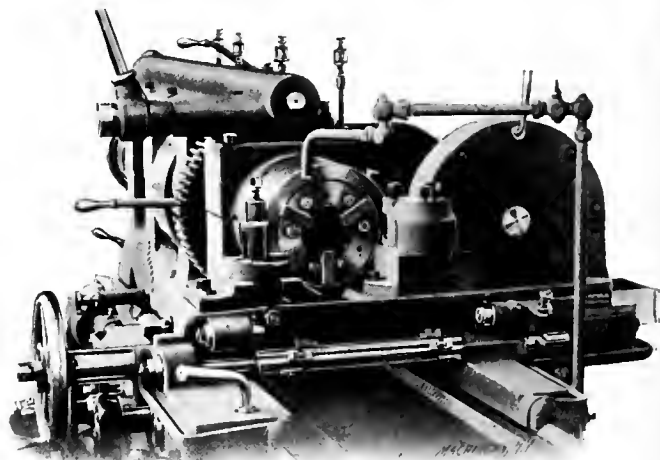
Front View of Head-stock and Side View of Carriage of 4 by 48-inch Marvel Lathe showing Automatically-revolving Stop Bar
